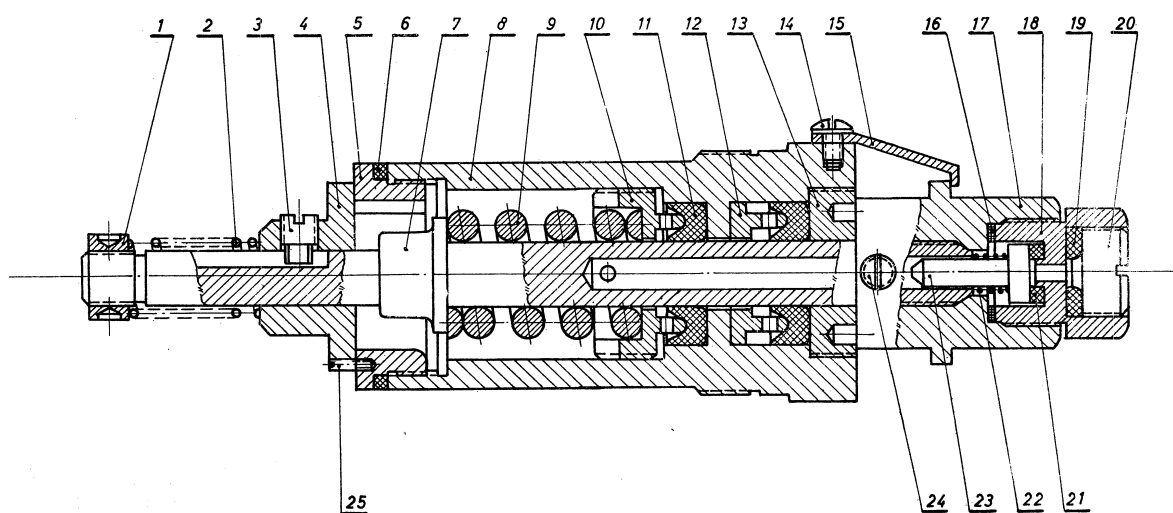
COUNTER RECOIL SPEED REGULATOR
